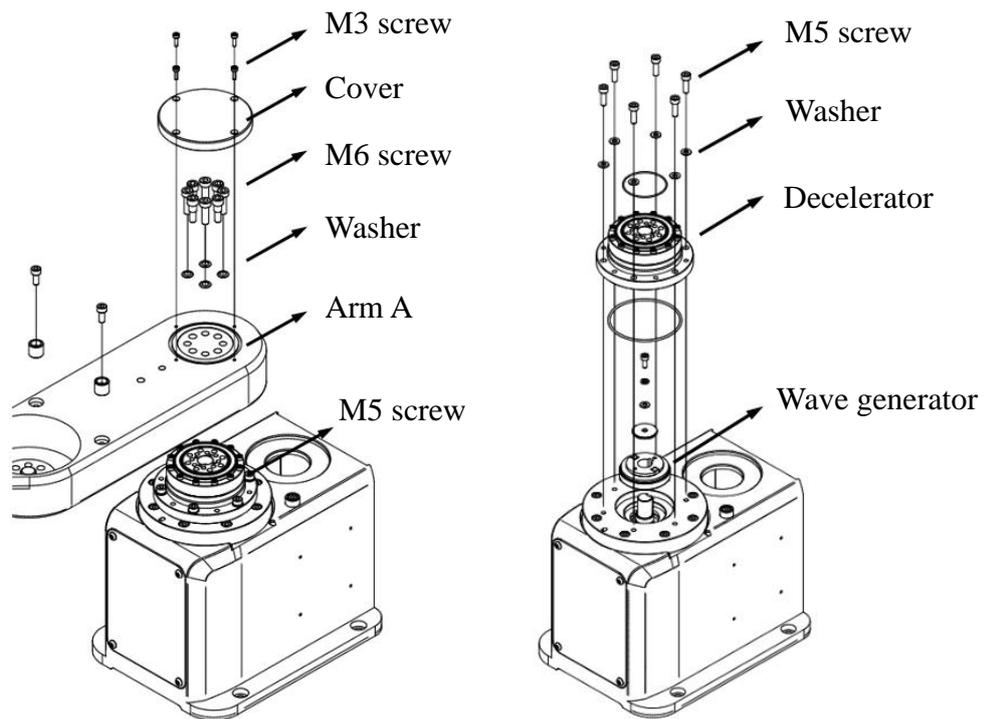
Illustrations of Disassembling Decelerator for Robot J1
